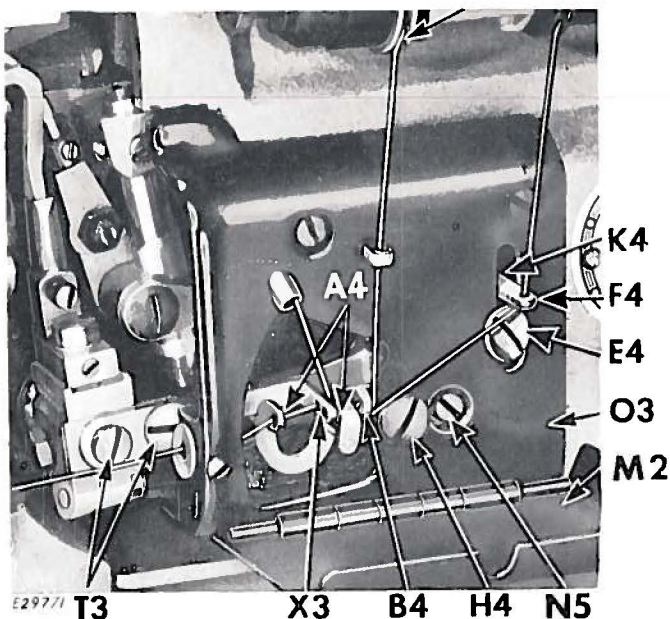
Adjustments on Take-up for Two Thread Stitch and Three Thread Tight Needle Thread Stitch
